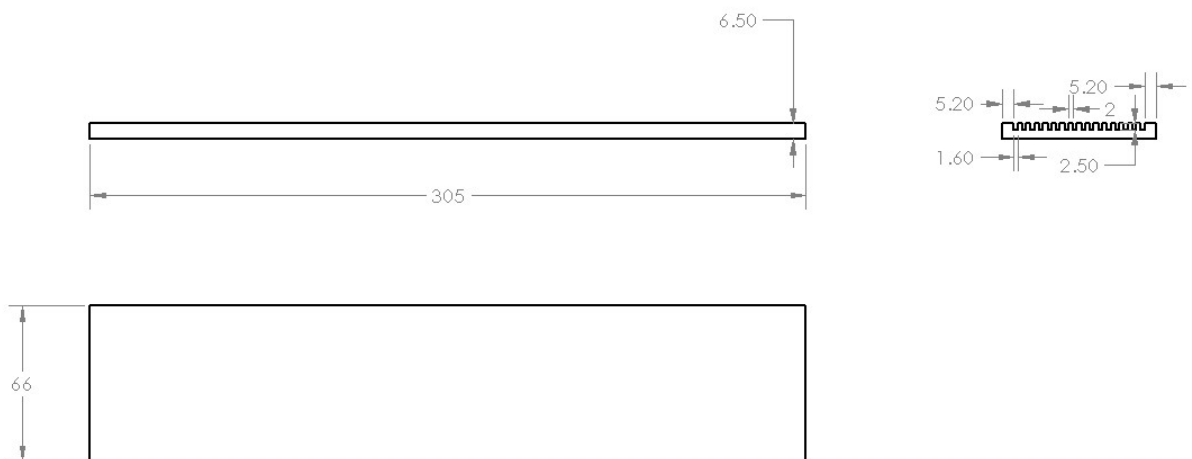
CAD drawing of aluminium base plate for 2mm channel width (multiple views)
